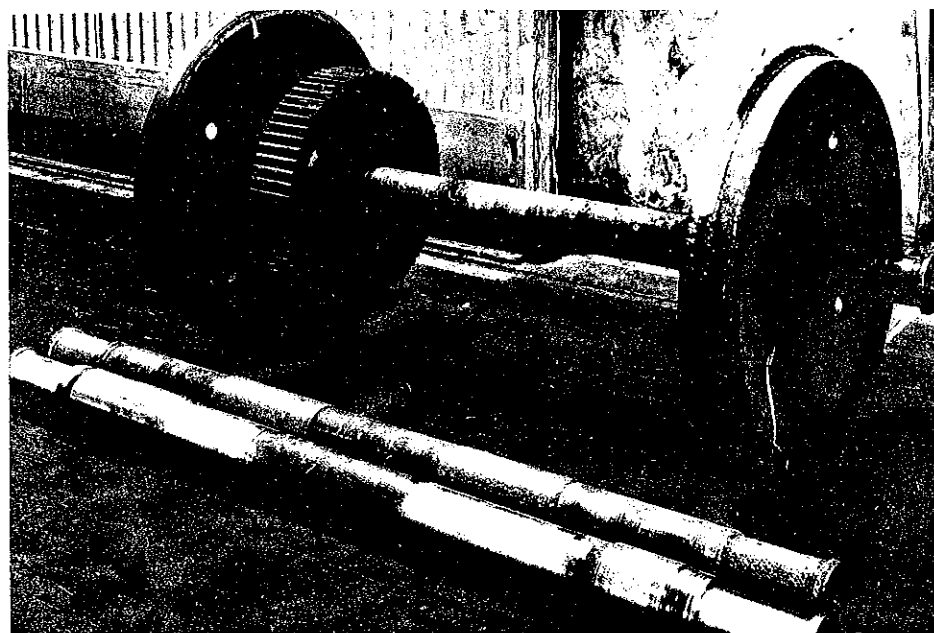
ARC WELDED CAR WHEEL FLANGES AND AXLES IN THE SHOPS OF THE WORCESTER CONSOLIDATED STREET RAILWAY. THE AXLE TOWARD THE CAMERA HAS BEEN WELDED AND MACHINED.
